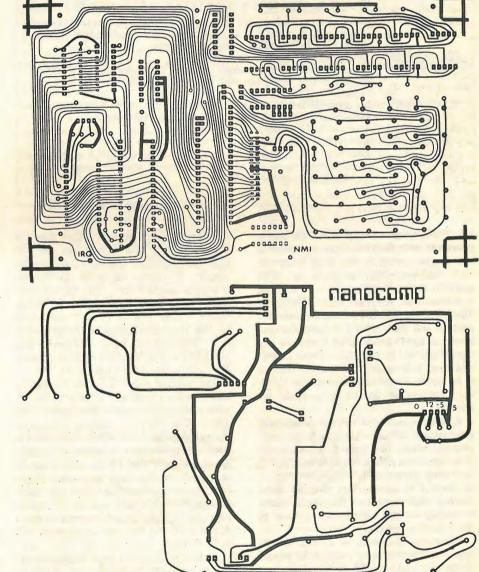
Assembled printed circuit board and layout details. The board measures 200 x 120mm
